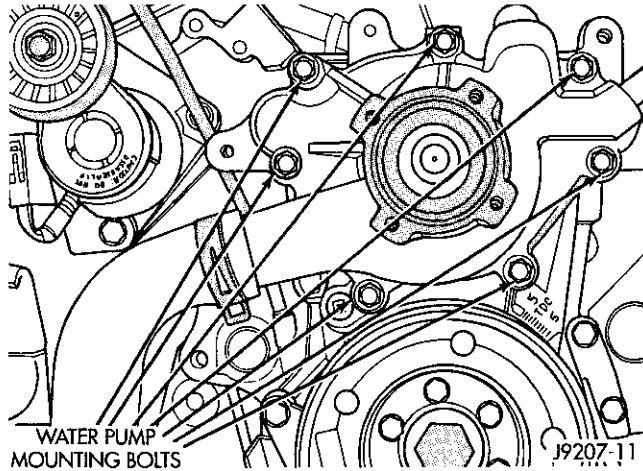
Water Pump Bolts—3.9L V-6 or 5.2/5.9L V-8 Gas Engines—Typical
